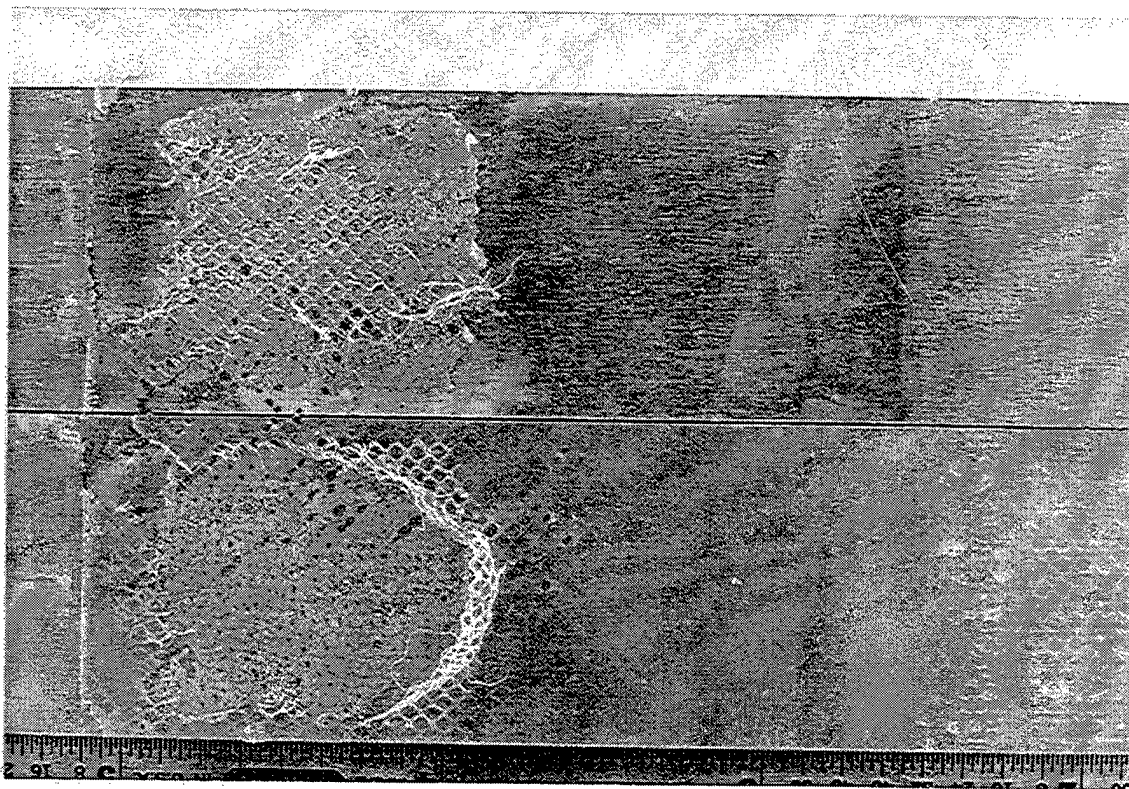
Photograph Of Wedge Specimen Fracture Surface Of IBED Treated Aluminum Alloy 2024-T3.
